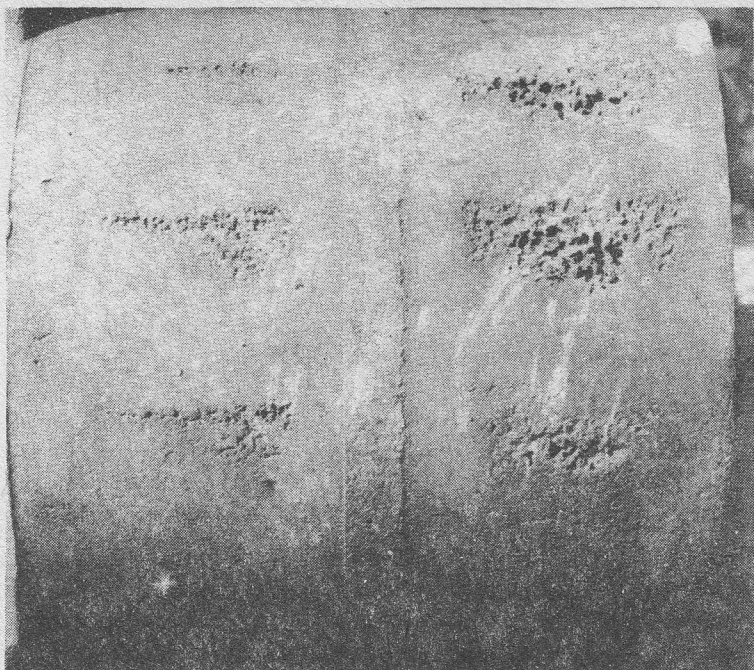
Cavitation pitting in the guide ring vane journal (reversible machine, pumped-storage power plant at Żydowo)
